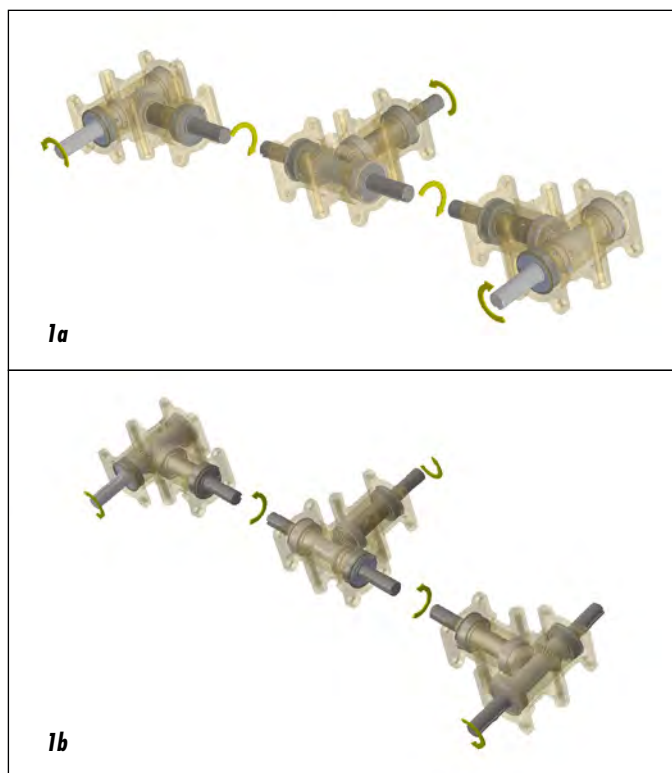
and 1b—Anglgear gearboxes can be outfitted with opposite-rotation input-to-output shafts (a) or the same rotation of input-to-output shafts (b).
